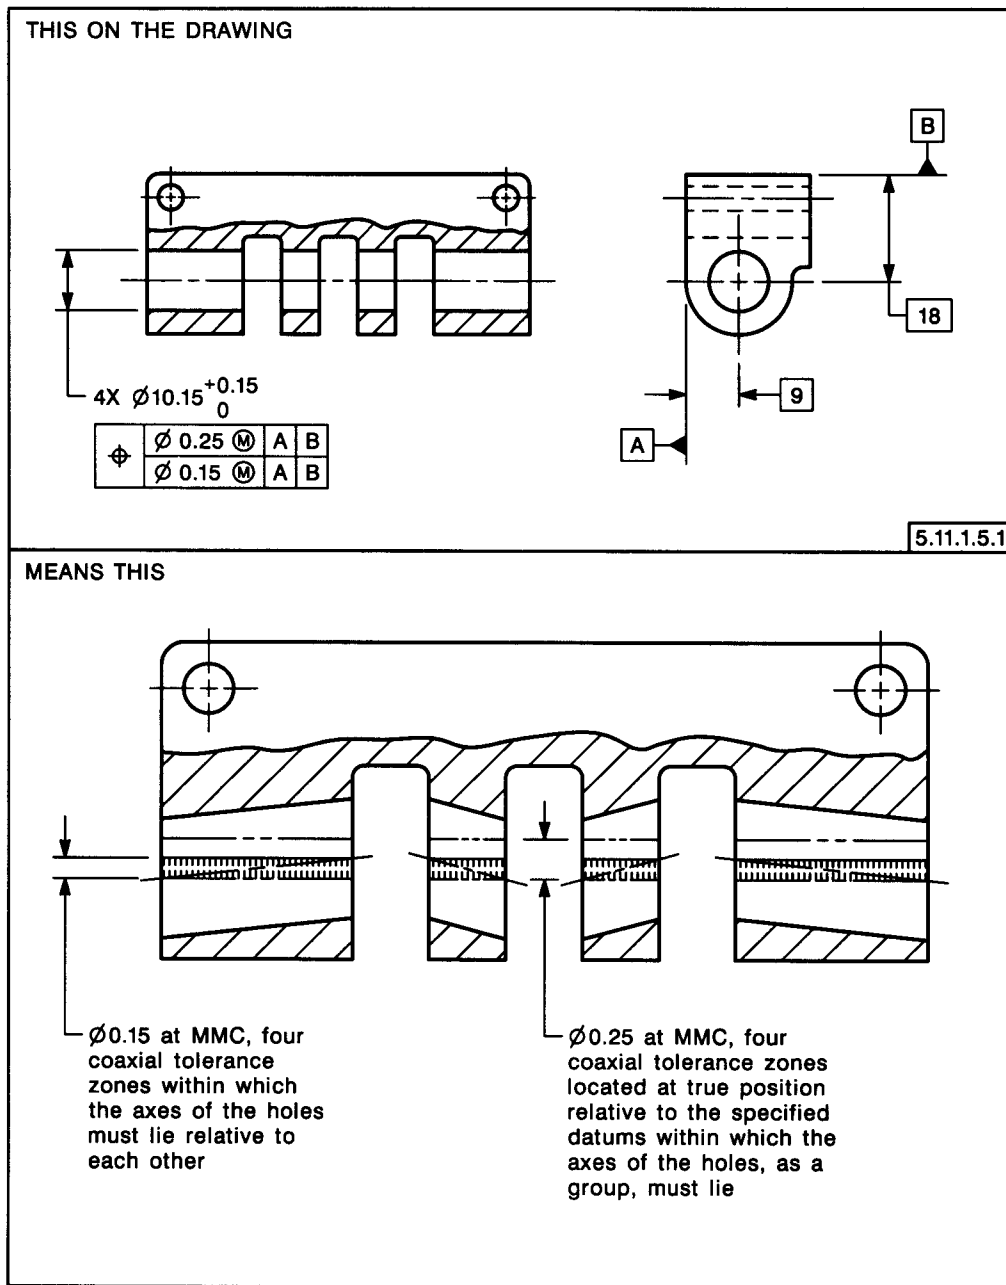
POSITIONAL TOLERANCING FOR COAXIAL HOLES OF SAME SIZE, PARTIAL (PARALLELISM) REFINEMENT OF FEATURE-RELATING AXIS
